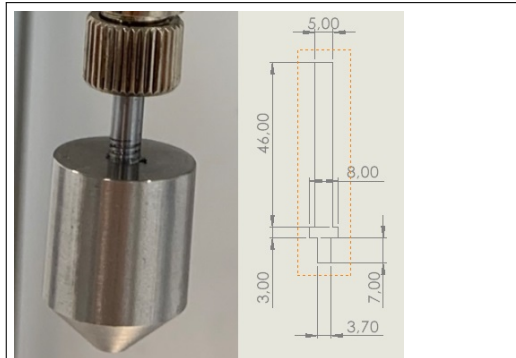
The tip contains a nut where the soldering iron rod (heat element) can be screwed in, enabling the use of multiple soldering iron tips. A bolt and nut mechanism ensures the tip and rod's position remains fixed and supports sufficient heat transfer from the soldering heat element to reach the desired sealing temperature. The tip displayed in this figure has a contact diameter of 1 [mm].
